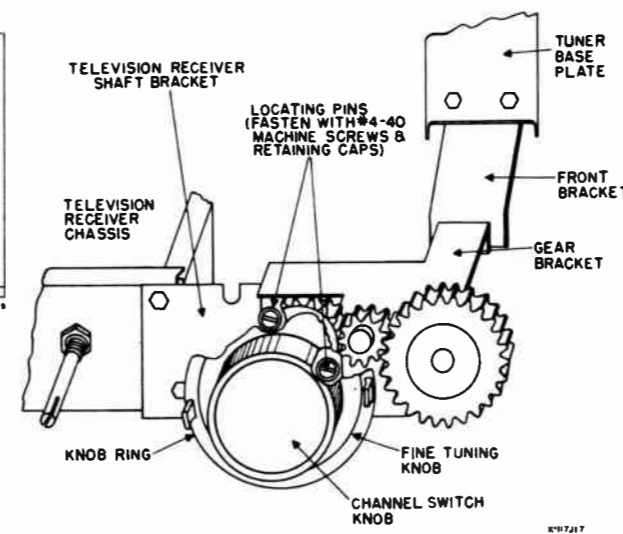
UHF-Tuner Front Assembly, Models 17C125 and 20C107
